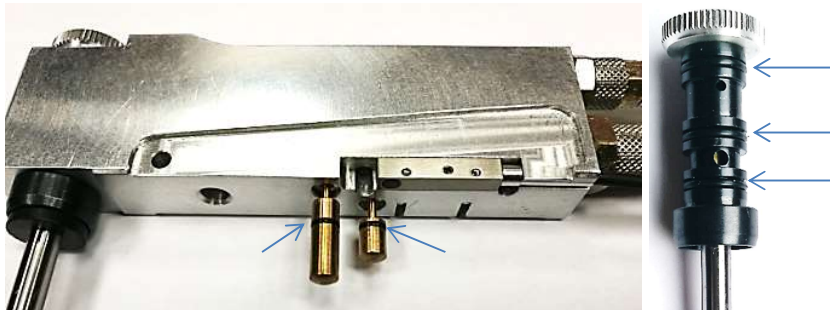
Replaceable O rings of oiling gun and lubricating nozzle
